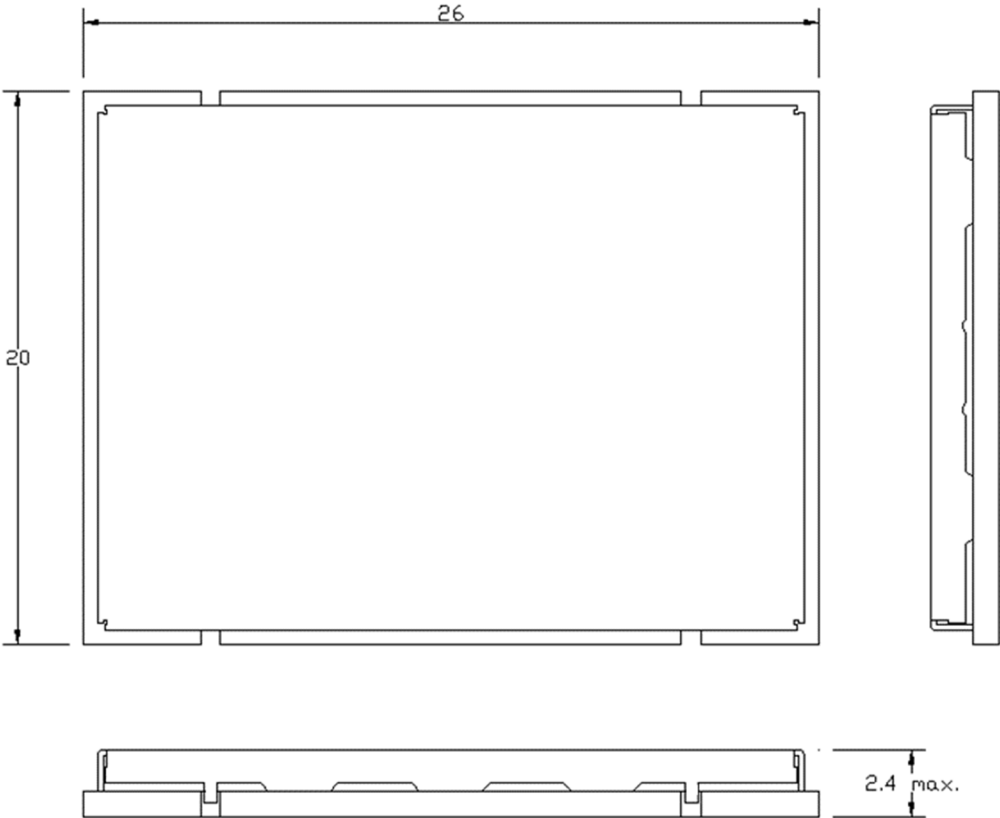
Dimensions of the module (TOP VIEW) (unit: mm)
